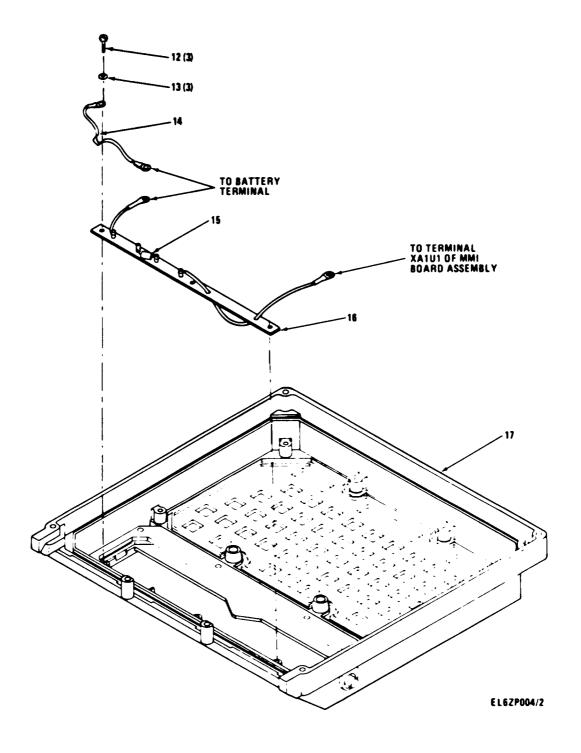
Keyer-Message Device KY-879/P, Top Cover Assembly (Sheet 2 of 2).
